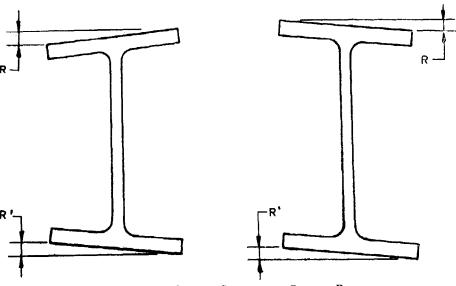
FLANGES OUT OF SQUARE OR OUT OF PARALLEL
